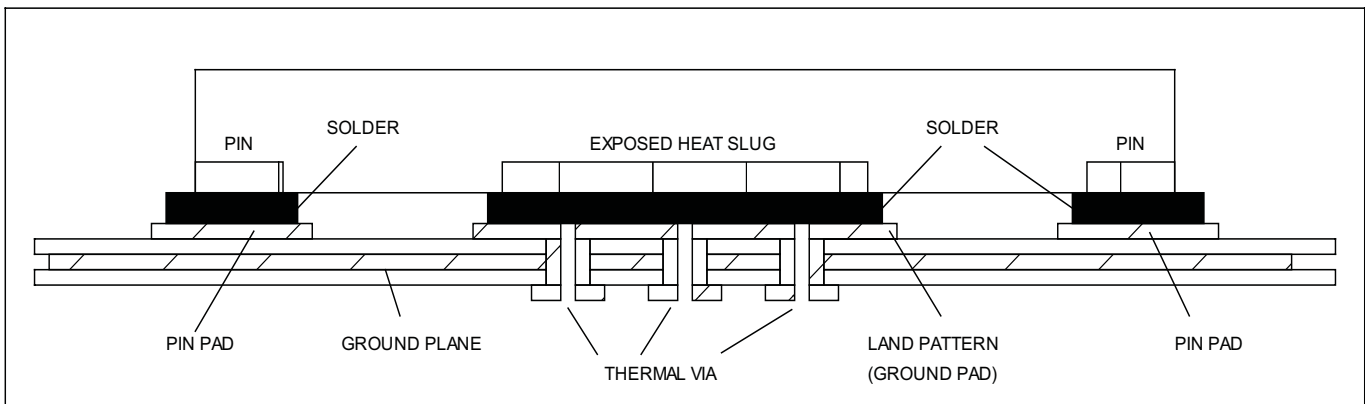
P.C.ASSEMBLY FOR EXPOSED PAD THERMAL RELEASE PATH –SIDE VIEW (DRAWING NOT TO SCALE)
